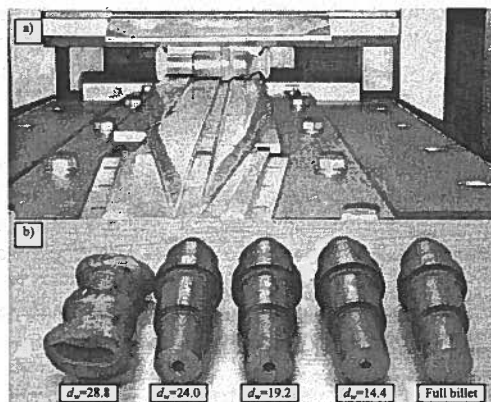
Workpiece of cutter body during forming from hollowed charge (a) and examples of bodies rolled from bush with internal diameter given in Figure (b)
